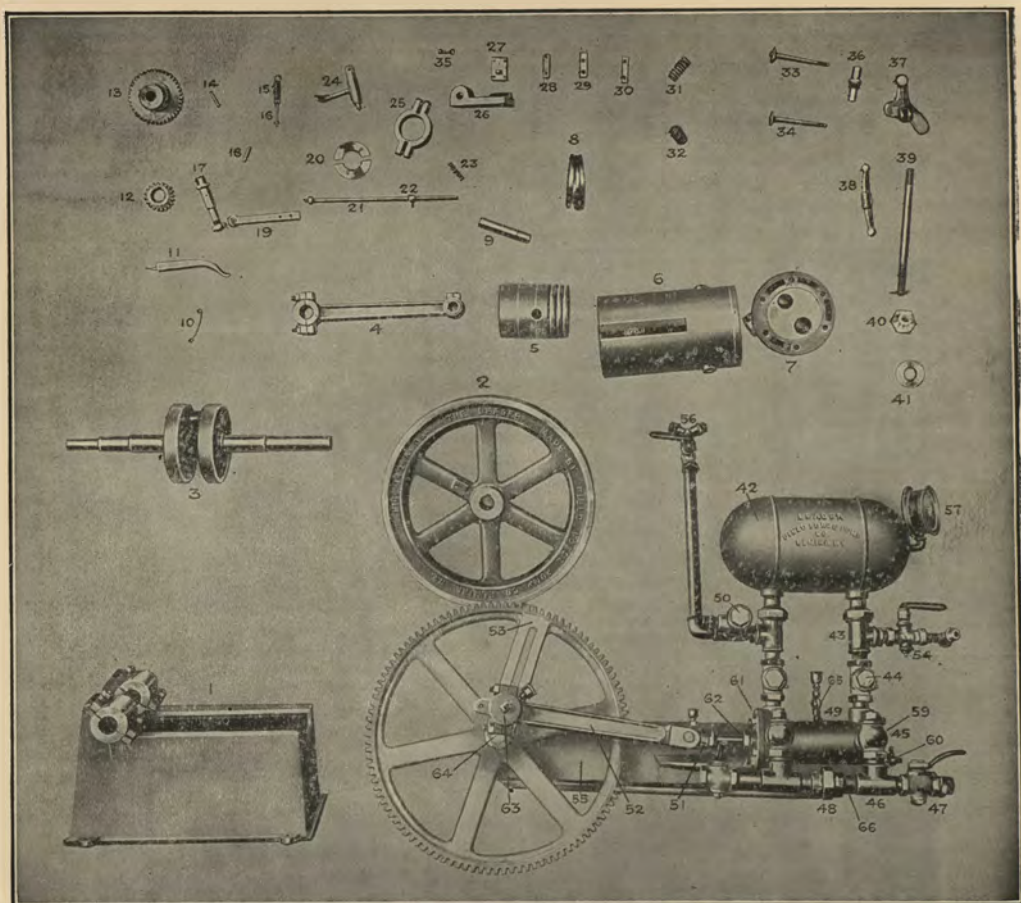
Detached Parts of "LEADER" Engine and Pump
